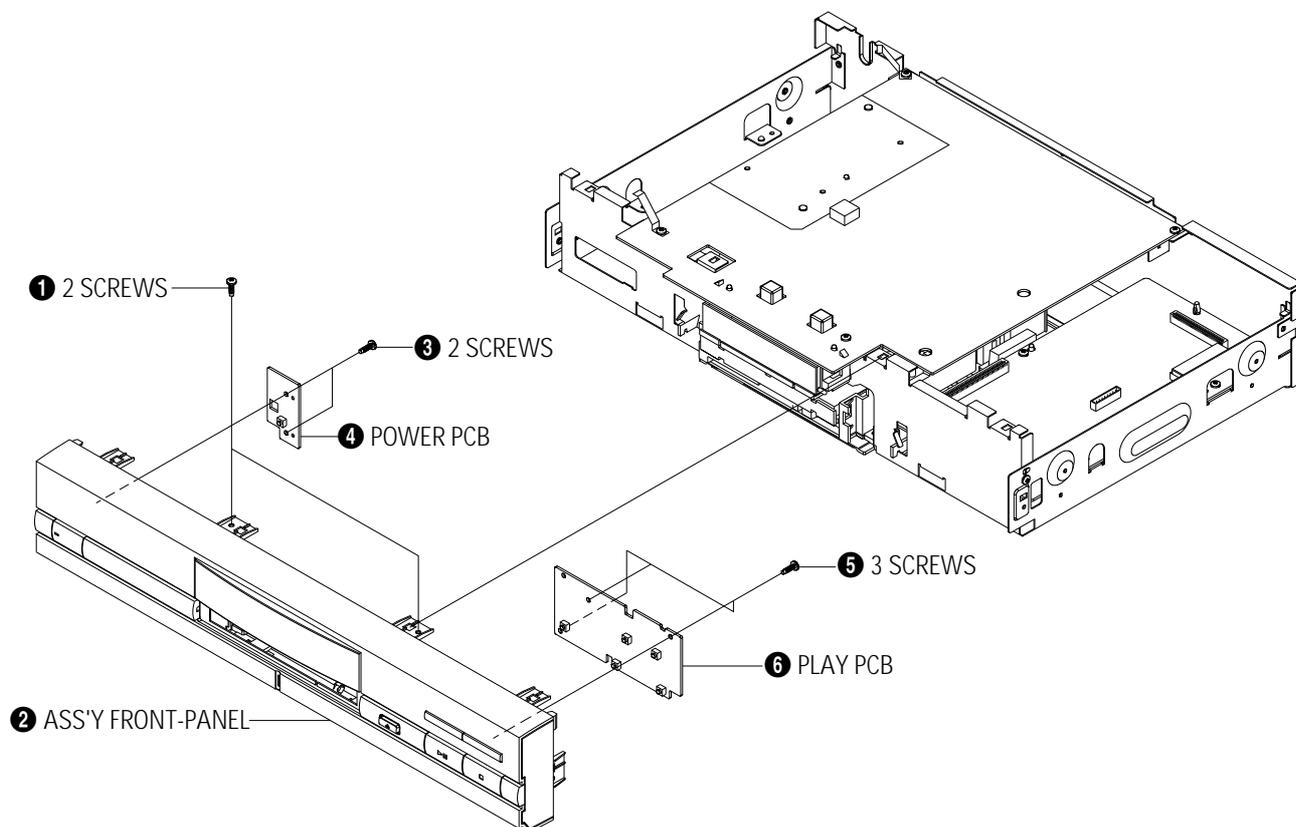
Ass'y Front-Panel, Power PCB, Play PCB Removal
